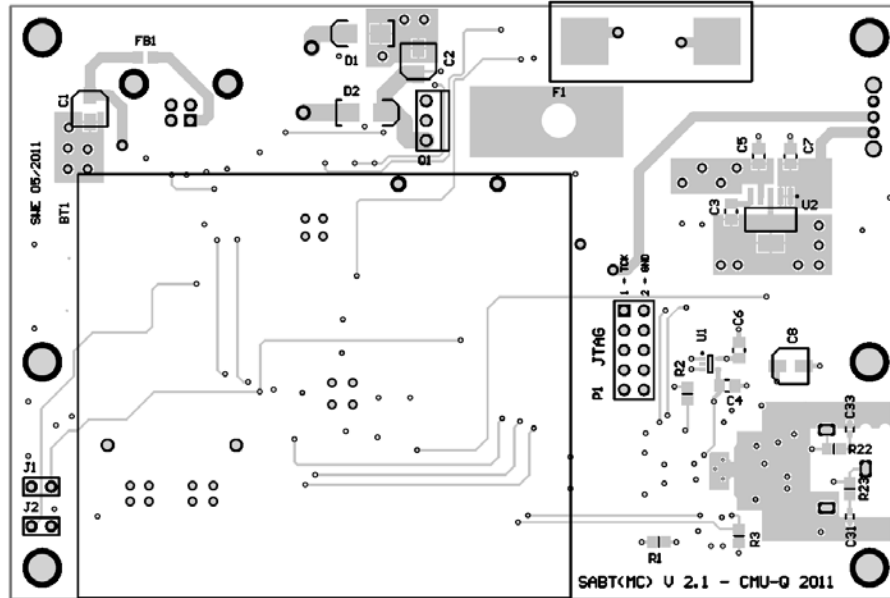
SABT main control module PCB - TOP ROUTING layer.
